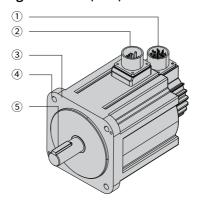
Components of servo drives in flange sizes 100/130/180
